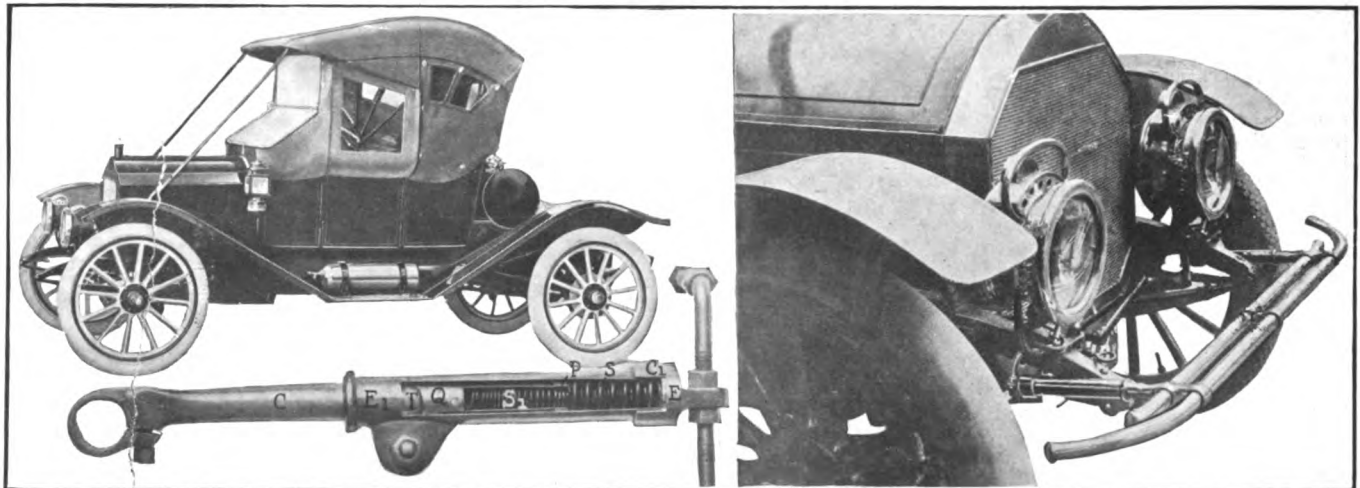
Studebaker close winter side curtains. Fig. 6—Interior view of Randerson bumper mechanism. Fig. 7—Randerson double-rail bumper on car
